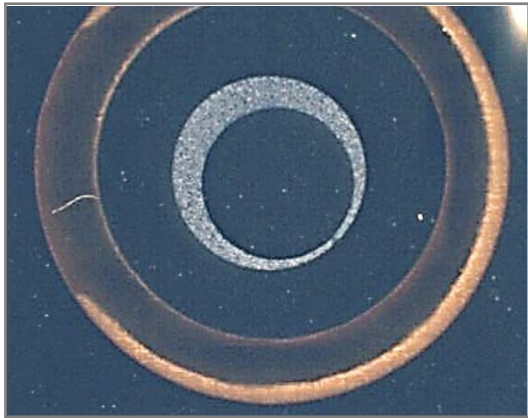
In-plane section of a failed PCB showing fiber contamination in a clearance of a plated through-hole.
